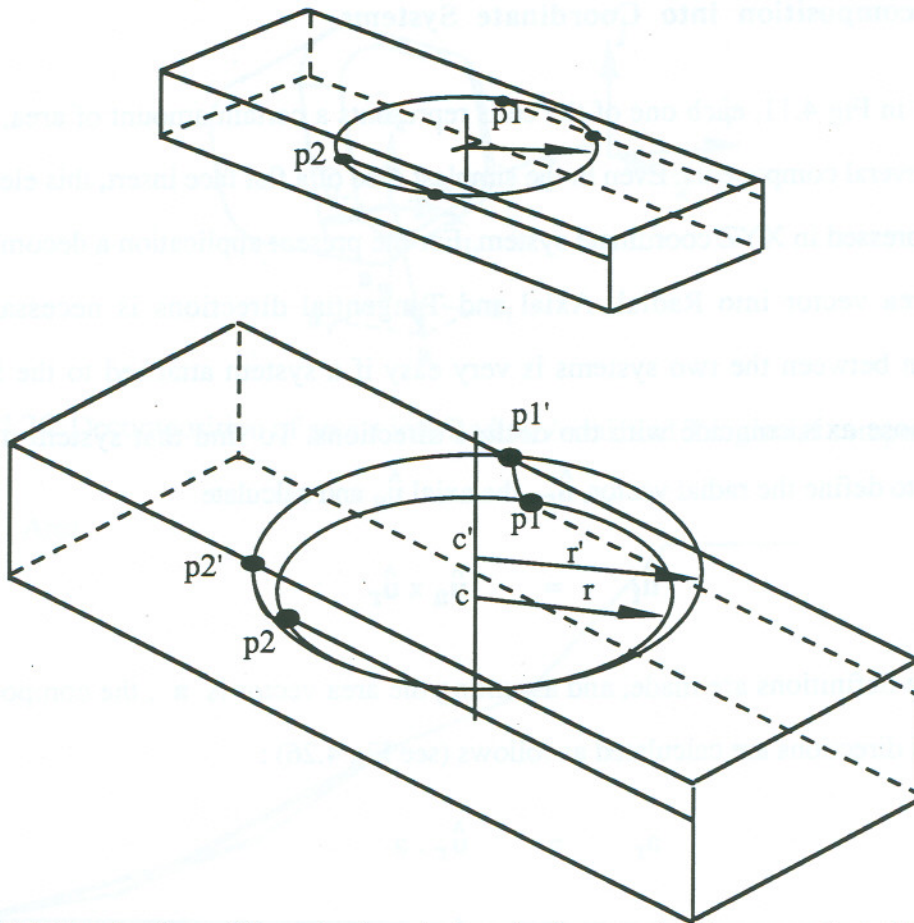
Determination of the actual workpiece by intersection between the initial wedge and the rings approaching the tool geometry. Above: Calculation of a pair of points  $p_1$ ,  $p_2$ . Below: Extension of the above concept to obtain edges  $p_1$ - $p_1'$  and  $p_2$ - $p_2'$ .
